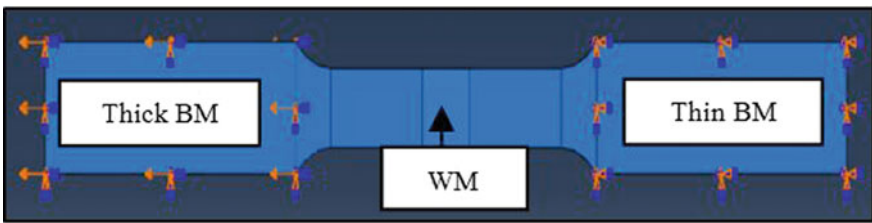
Boundary Conditions applied to the tensile specimen (WM = Weld Metal, BM = Base Metal)
